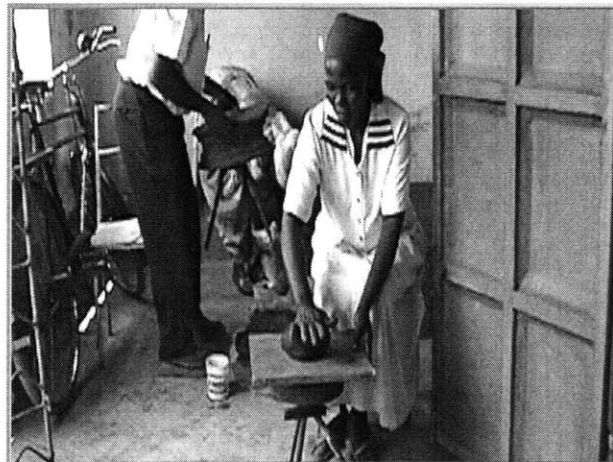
Potter, front, begins forming base by pounding clay into a flat disk.
